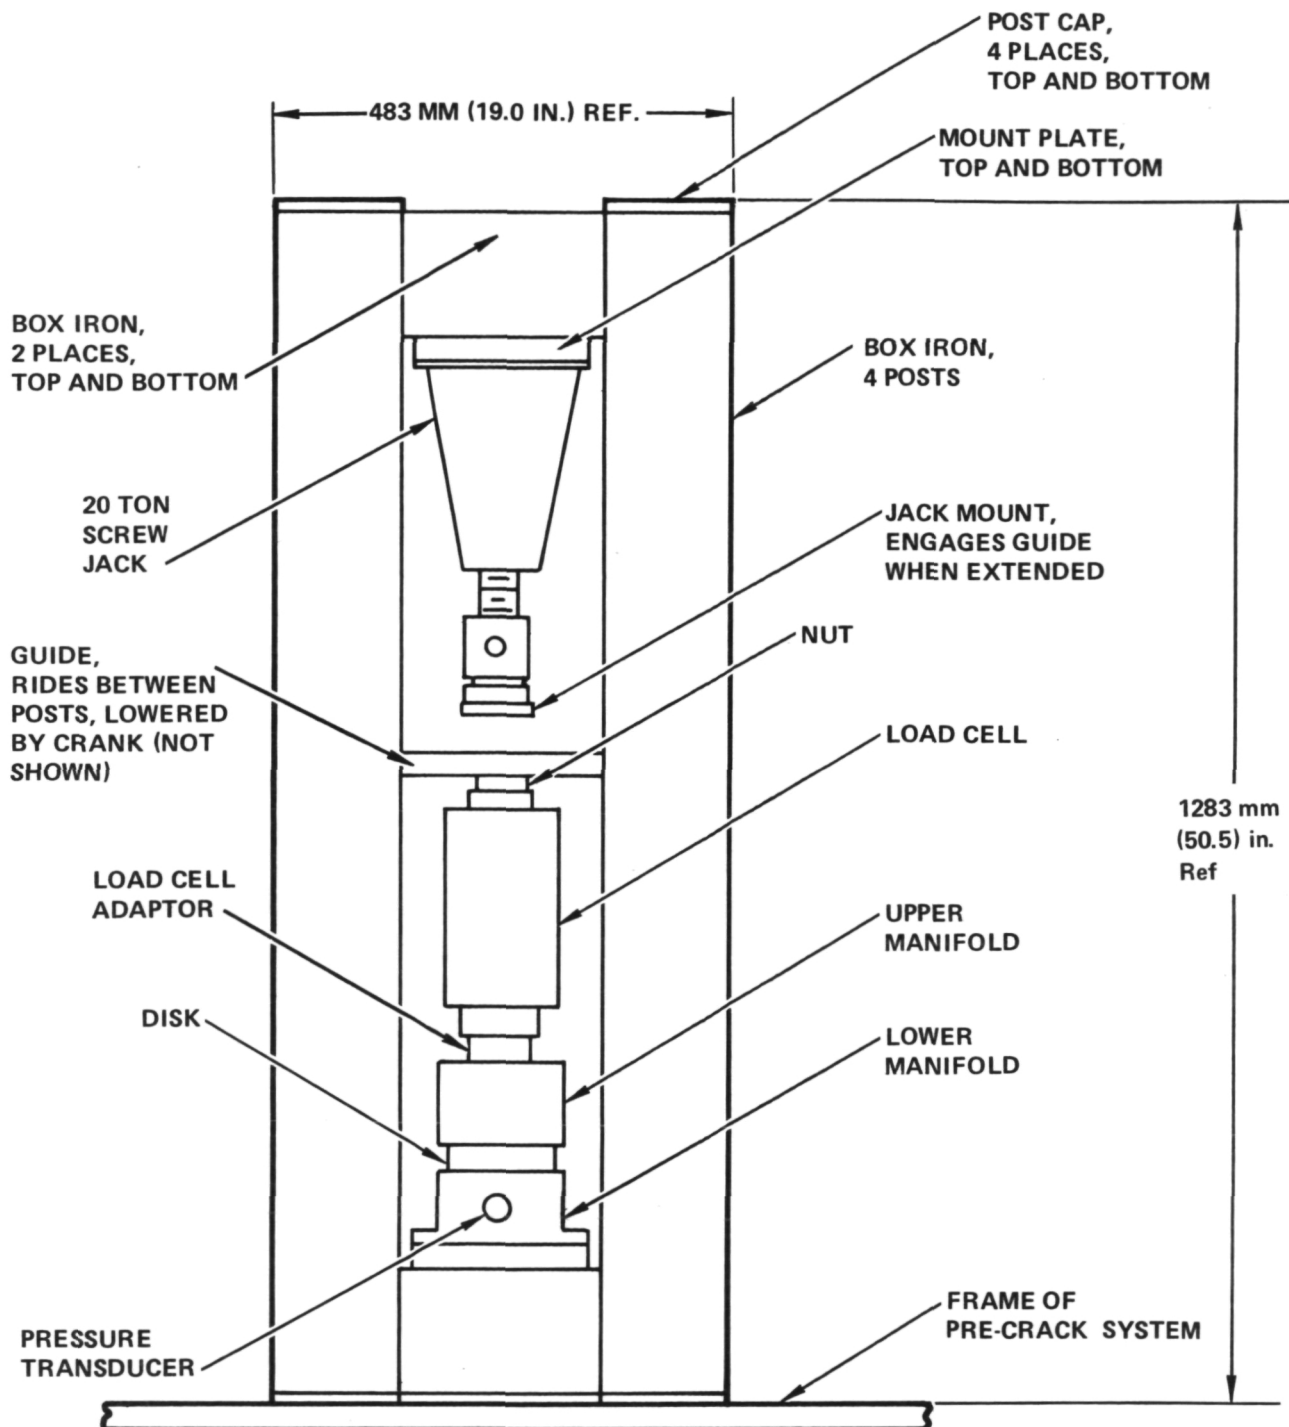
Schematic of Frame Assembly Used to Preload Disks for Precracking
